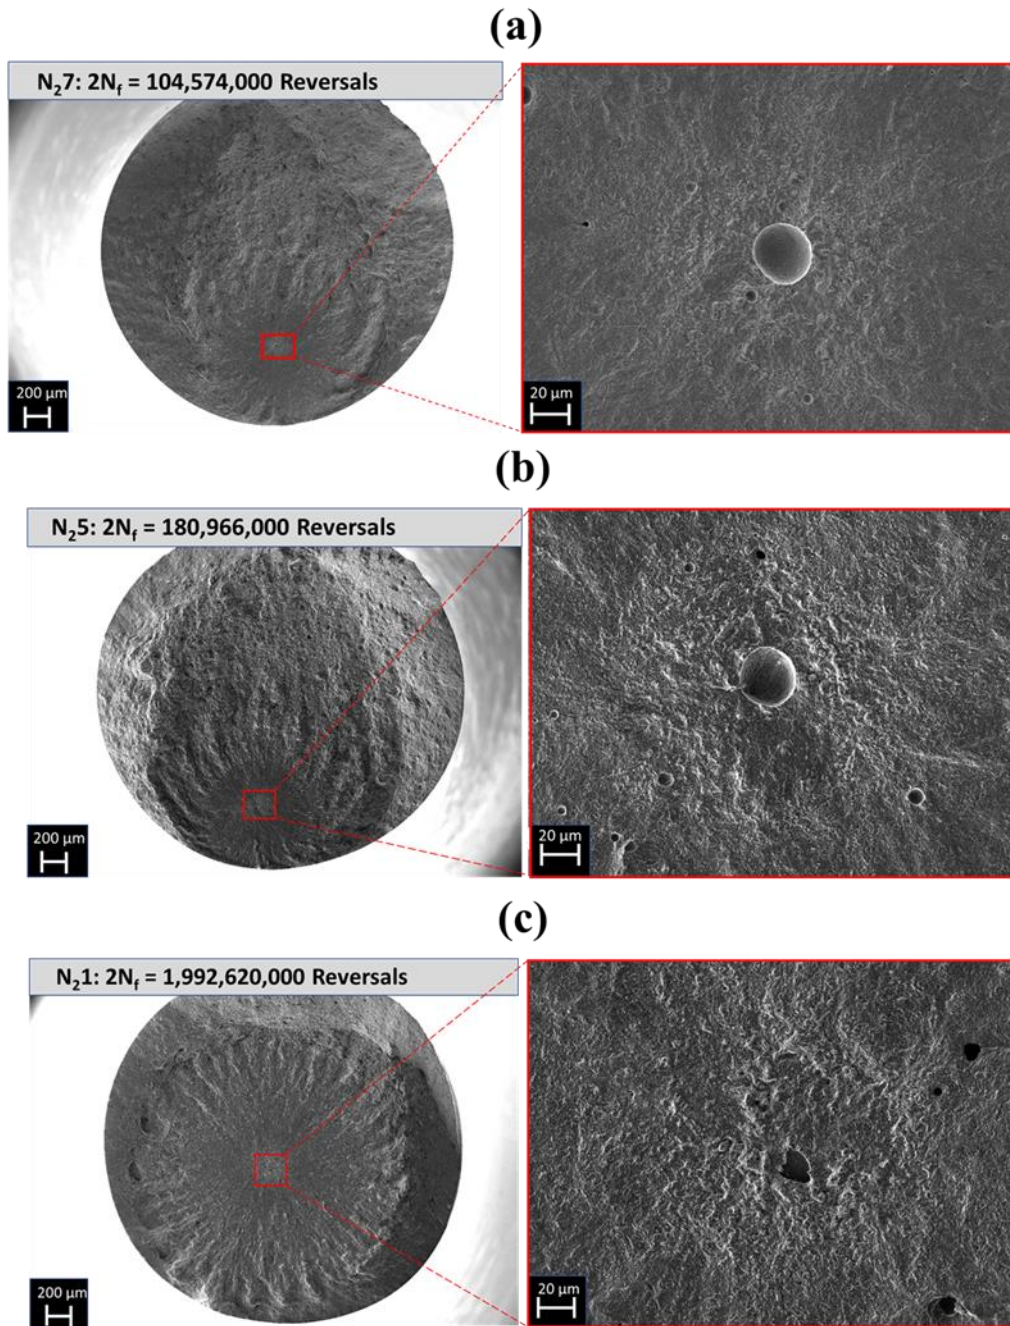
Fracture surfaces of ultrasonic N_2 -shielded specimens: (a) specimen "N₂7" tested at 500MPa with 104,574,000 reversals to failure, (b) specimen "N₂5" tested at 475MPa with 180,966,000 reversals to failure, and (c) specimen "N₂1" tested at 450MPa with 1,992,620,000 reversals to failure.
